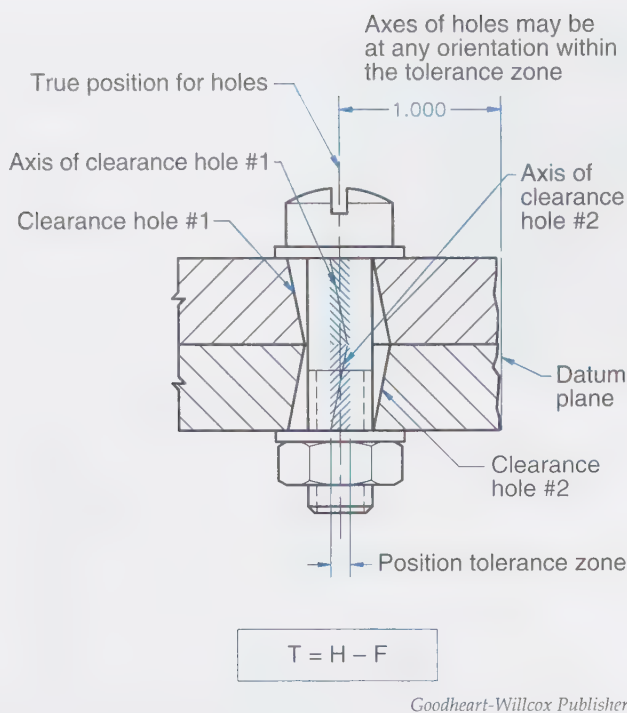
The axis of a hole may lie anywhere within the position tolerance specified for that hole.
